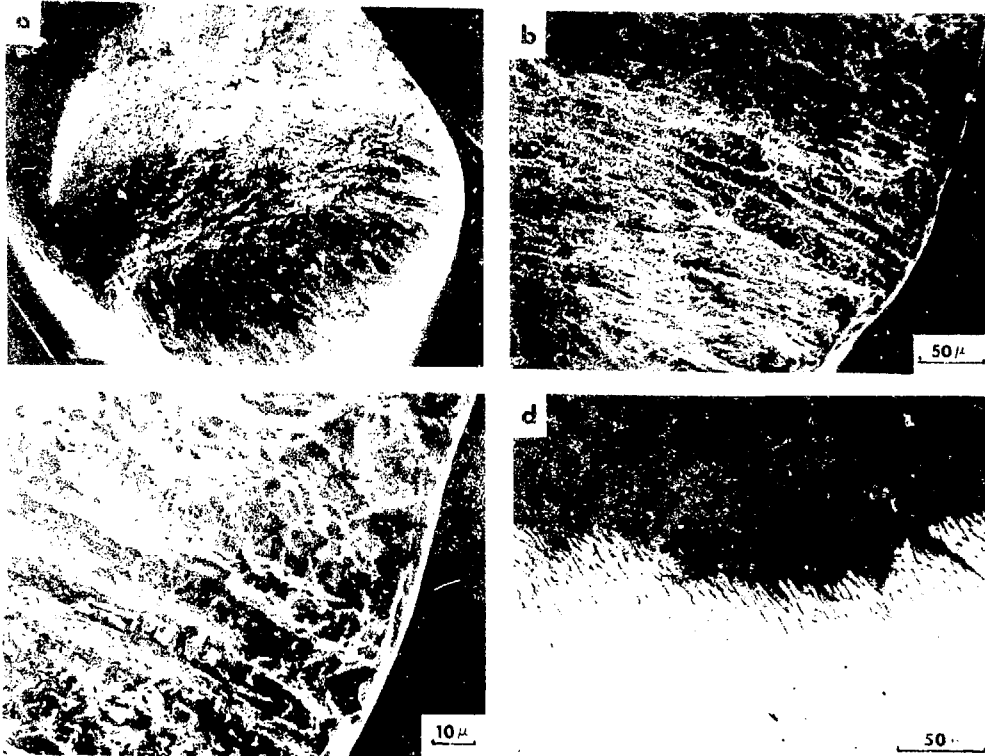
Fractography of 304L/308L GTA welds thermally charged and tested in 69 MPa hydrogen. Fracture is related to ferrite, shown in (d).
